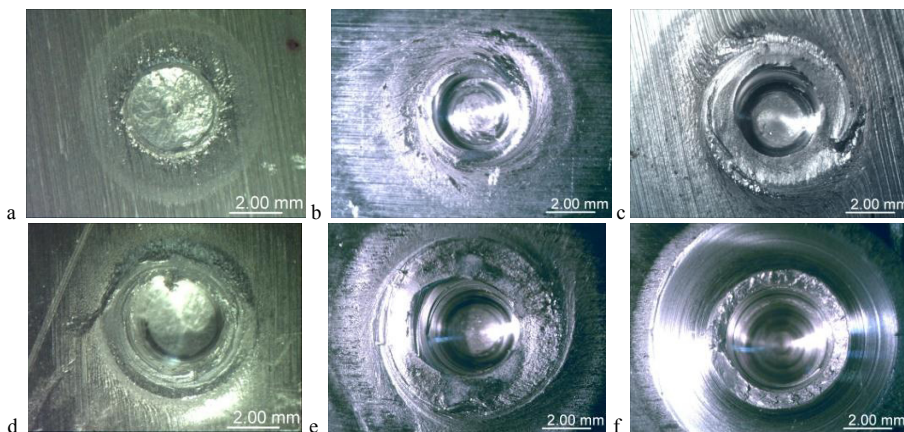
Fracture surfaces from Peel Tests: (a) 5-6-05; (b) 5-6-6; (c) 5-6-12; (d) 6-5-1; (e) 6-5-10; (f) 6-5-12.
